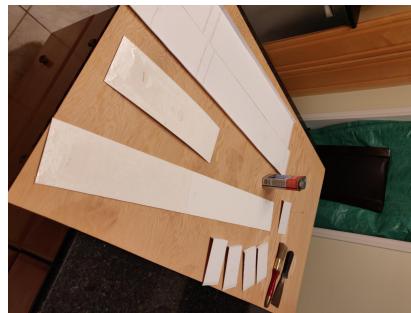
Applying contact cement to pieces of matboard that have been cut.
